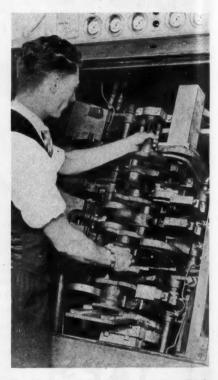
Equipment for Hardening Four Crank-shaft Bearing Journal Surfaces Simultaneously (Courtesy Ohio Crankshaft Co.)
